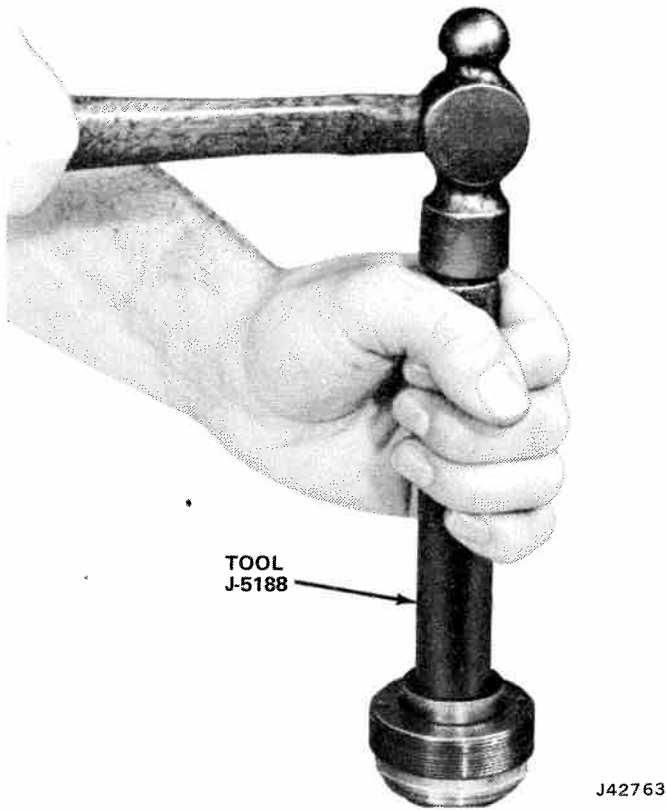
Installing Stub Shaft Seal in Adjuster Plug
